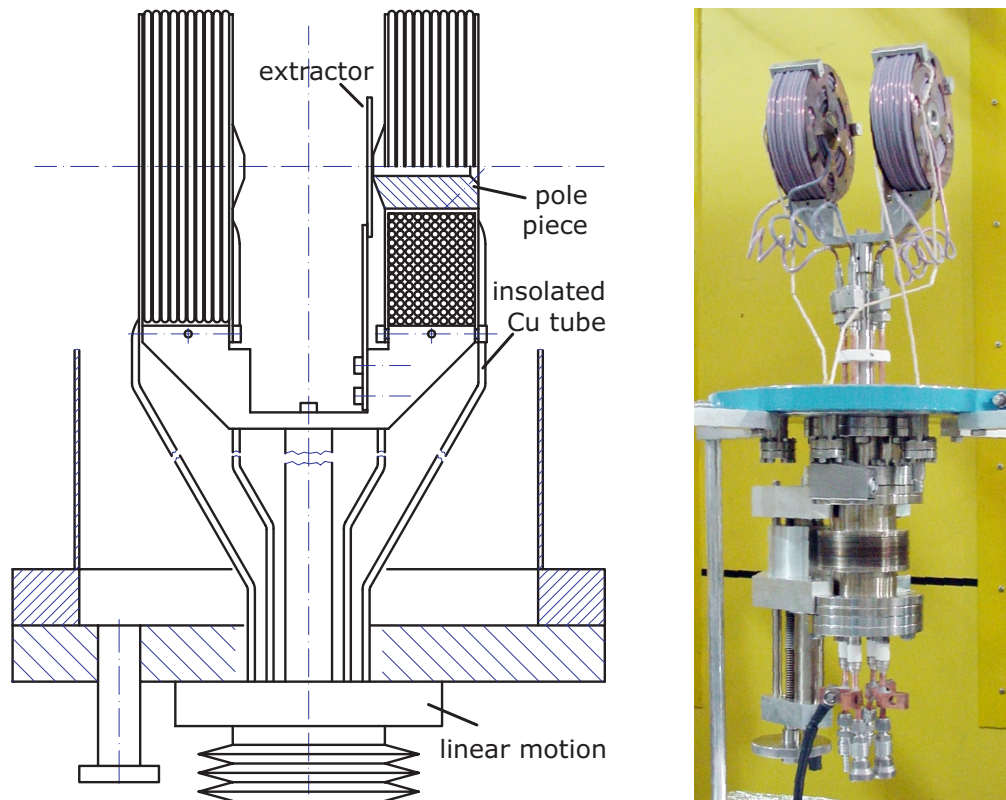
Part of the technical drawing of the new water-cooled coil system showing the overall assembly (left) and photograph before final installation on the UHV chamber (right). For the complete drawings see [78].
